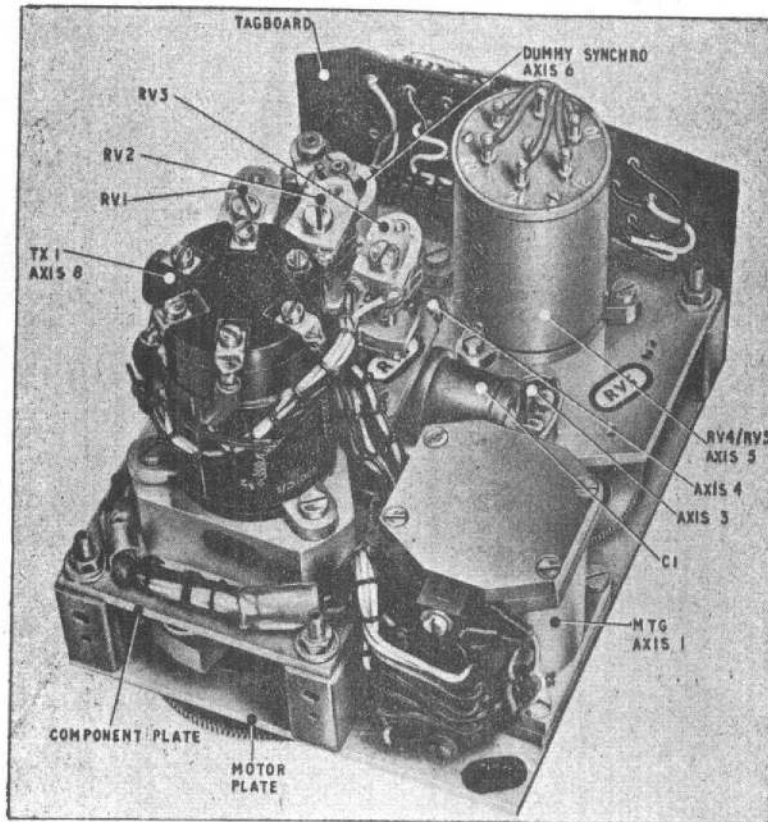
Vertical speed output gearbox assembly (G4)—view A
